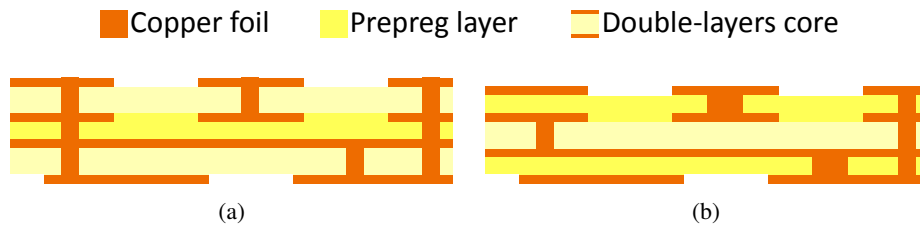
4-layer PCB realized with the stack-up: (a) double-layer core / prepregs / double-layer core (b) copper foils / prepregs / double-layer cores / prepregs / copper foils
